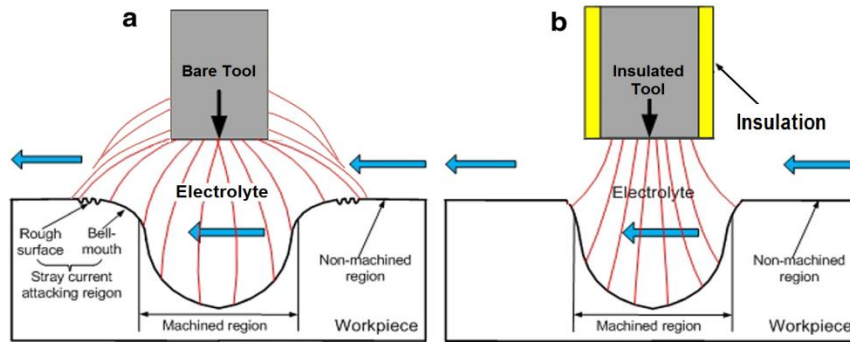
The schematic of the ECMM process (a) Using bare tool with flat cathode tip (b) Using side-insulated tool with flat cathode tip.
